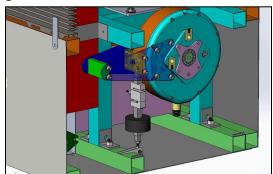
Section View of the Final Design Showing Load Cell Mounting Location
